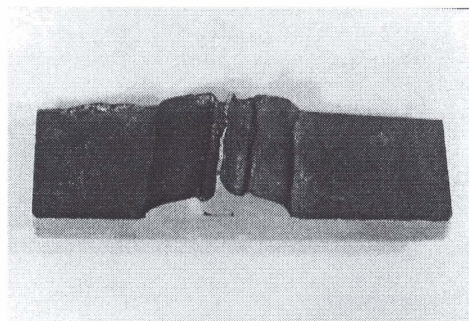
Cross-section of S31008/N06333 flight weldment in rotary carburising retort.
